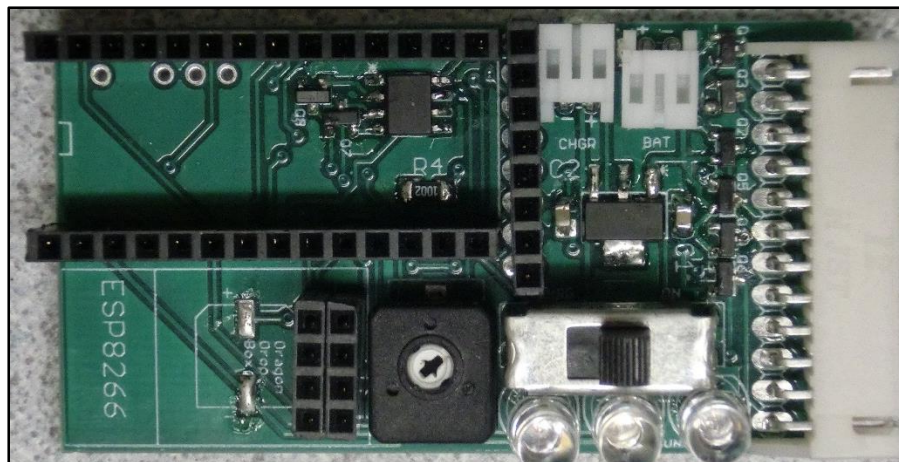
Final WAG Band PCB with surface mount components and female headers
